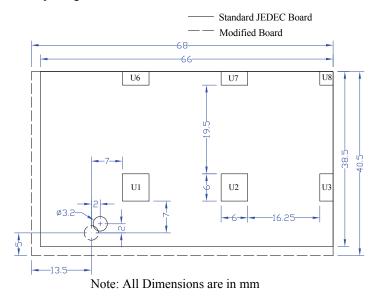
Schematic of Lower left Quarter Part of Standard JEDEC Board and Modified Board
